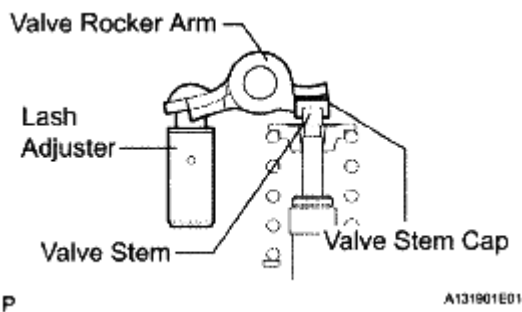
Applying Engine Oil To Lash Adjuster Tips And Valve Stem Cap Ends
